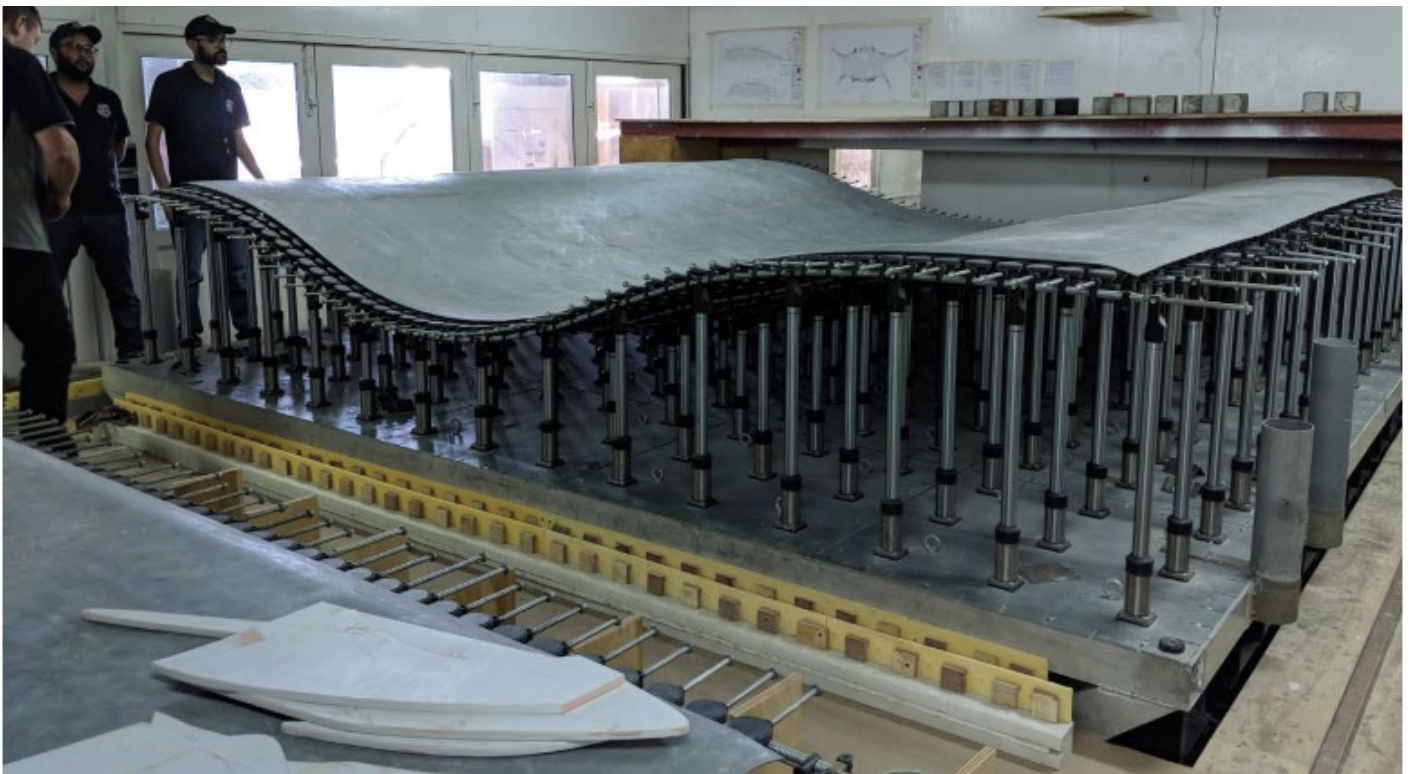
Adaptive mould technology. Photo courtesy of Adapa
